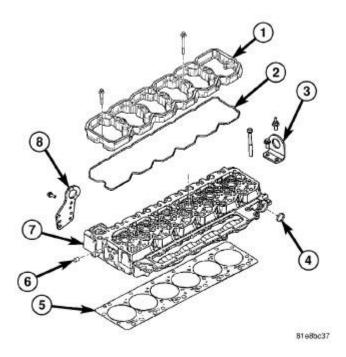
Cylinder Head Assembly & Gasket Courtesy of CHRYSLER GROUP, LLC
